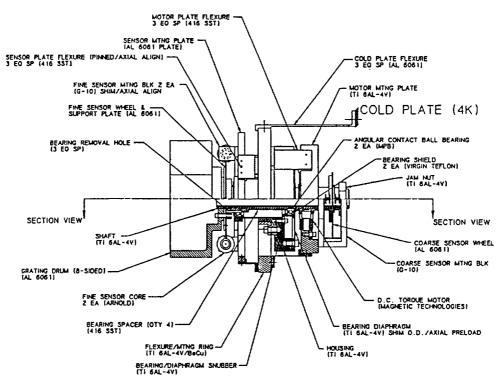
Orthogonal cross-section view of the IRS grating drive mechanism.
